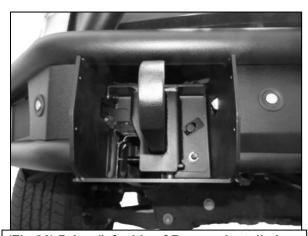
Use Double Bolt Plate to attach Shackle Mount to Bumper. Thread Plastic Retainers onto Bolt Plate to hold them in place for Bumper installation
